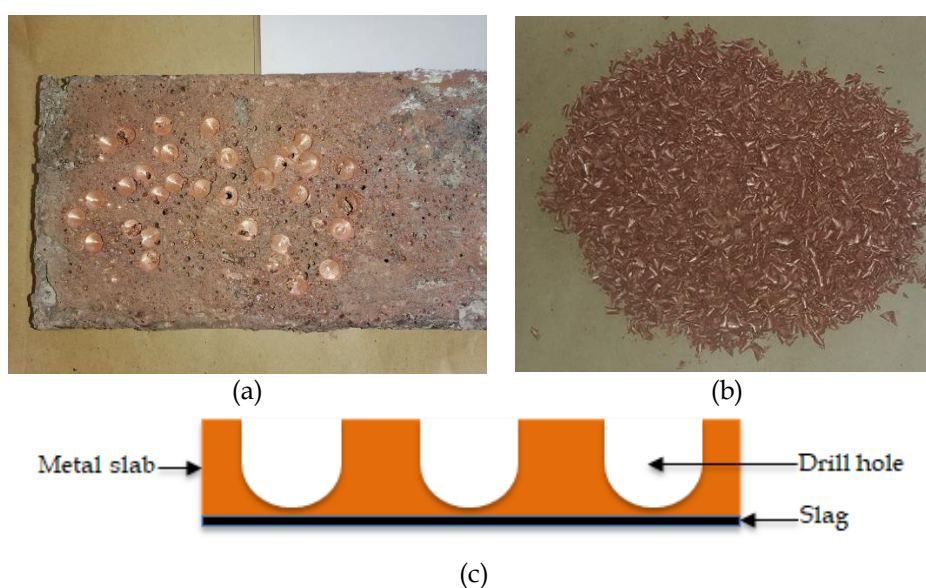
Image of (a) PCB metal slag with drill holes, (b) metal chips generated from drilling of metal slab, and (c) schematic showing how deep the metal slabs were drilled
